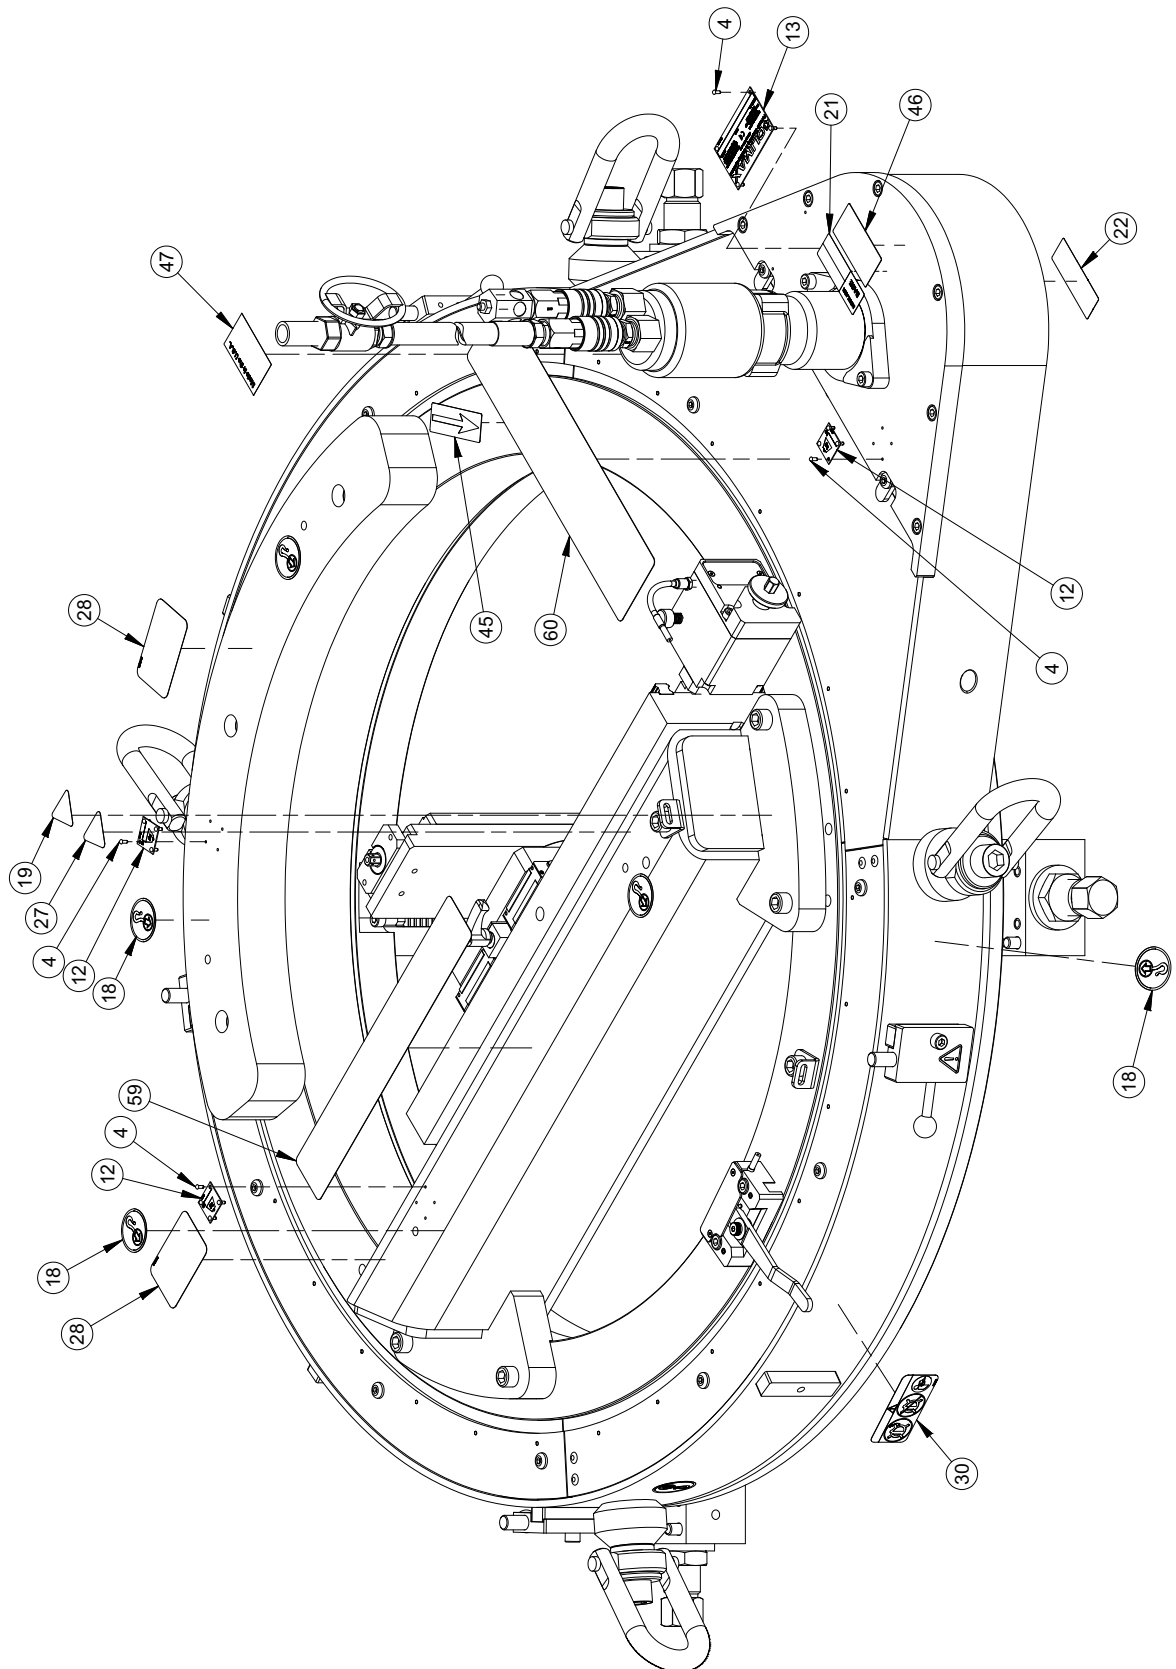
ODF30 SPEED FACER ASSEMBLY LABELS ASSEMBLY (P/N 88930)
